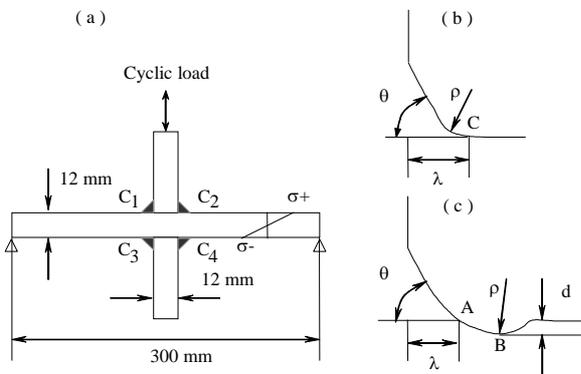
(a) Geometrical properties; (b) As-welded toe profile; (c) Weld toe profile after grinding
